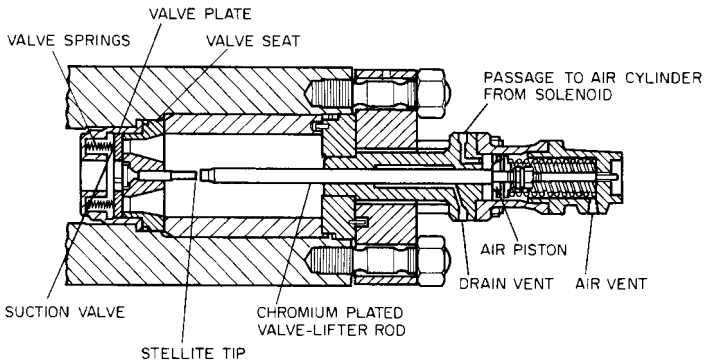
Synchronized unloading keeps the valve open through the use of a suction valve unloader.
